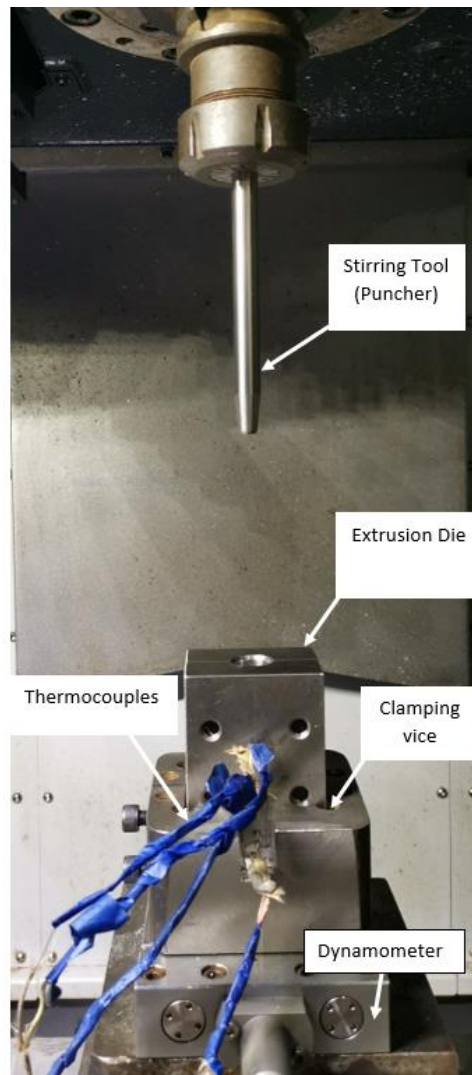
Experimental setup used to manufacture FSBE tubes.
